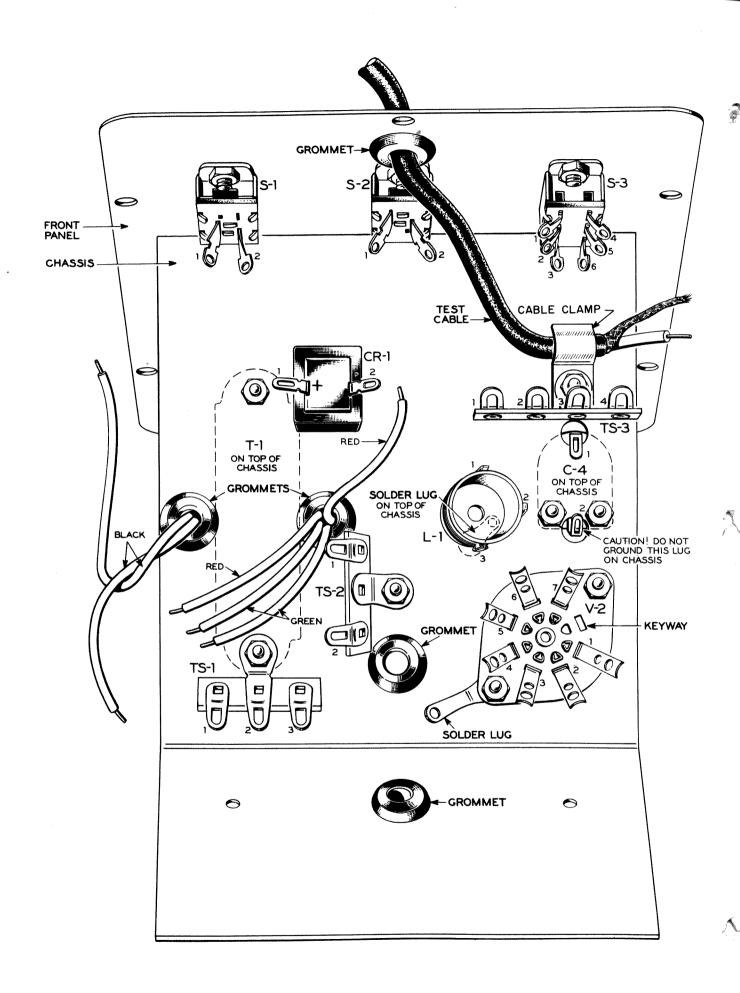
HOW TO MOUNT PARTS ON THE CHASSIS
